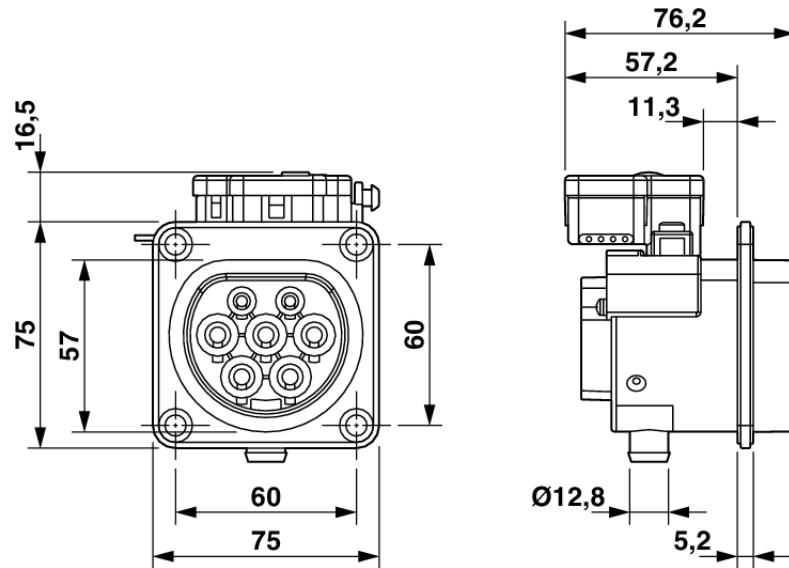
Infrastructure Socket Outlet - view of front and side
